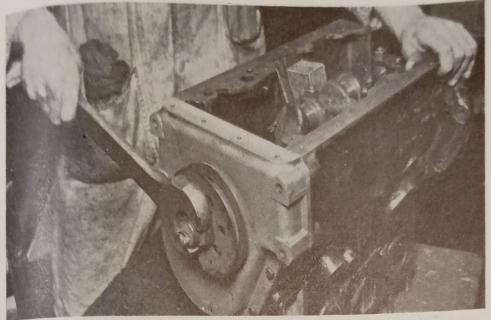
DISMANTLING THE ENGINE Wedging the crankshaft with a block of wood whilst starting dog nut is removed.
